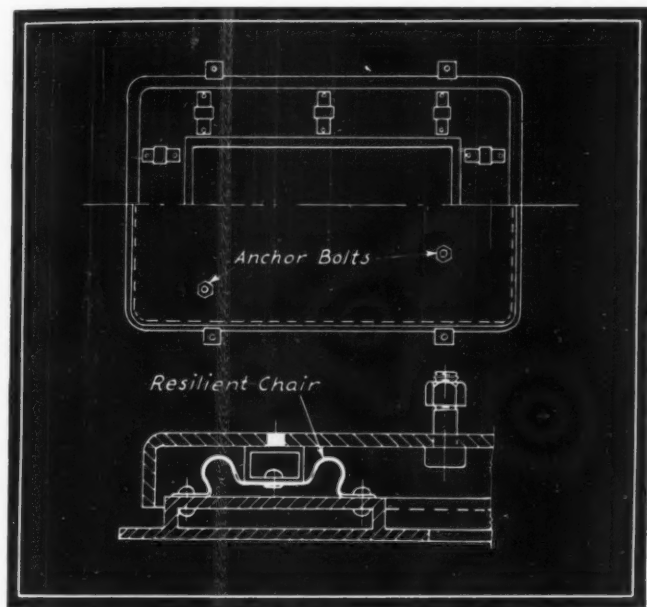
(Top)—Sound insulative base with section of platform removed. (Bottom)—Section through base
